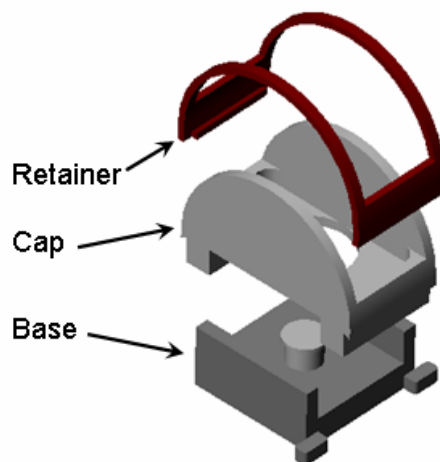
Exploded Schematic View of the XRD Sample Holder (Kapton[®] film not shown) (see Strachan et al. 2003)
